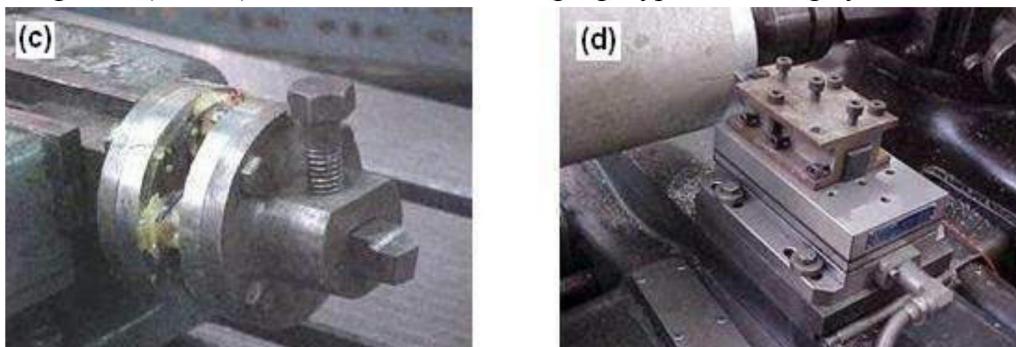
(c) Photographic view of a strain gauge type 2D turning dynamometer
